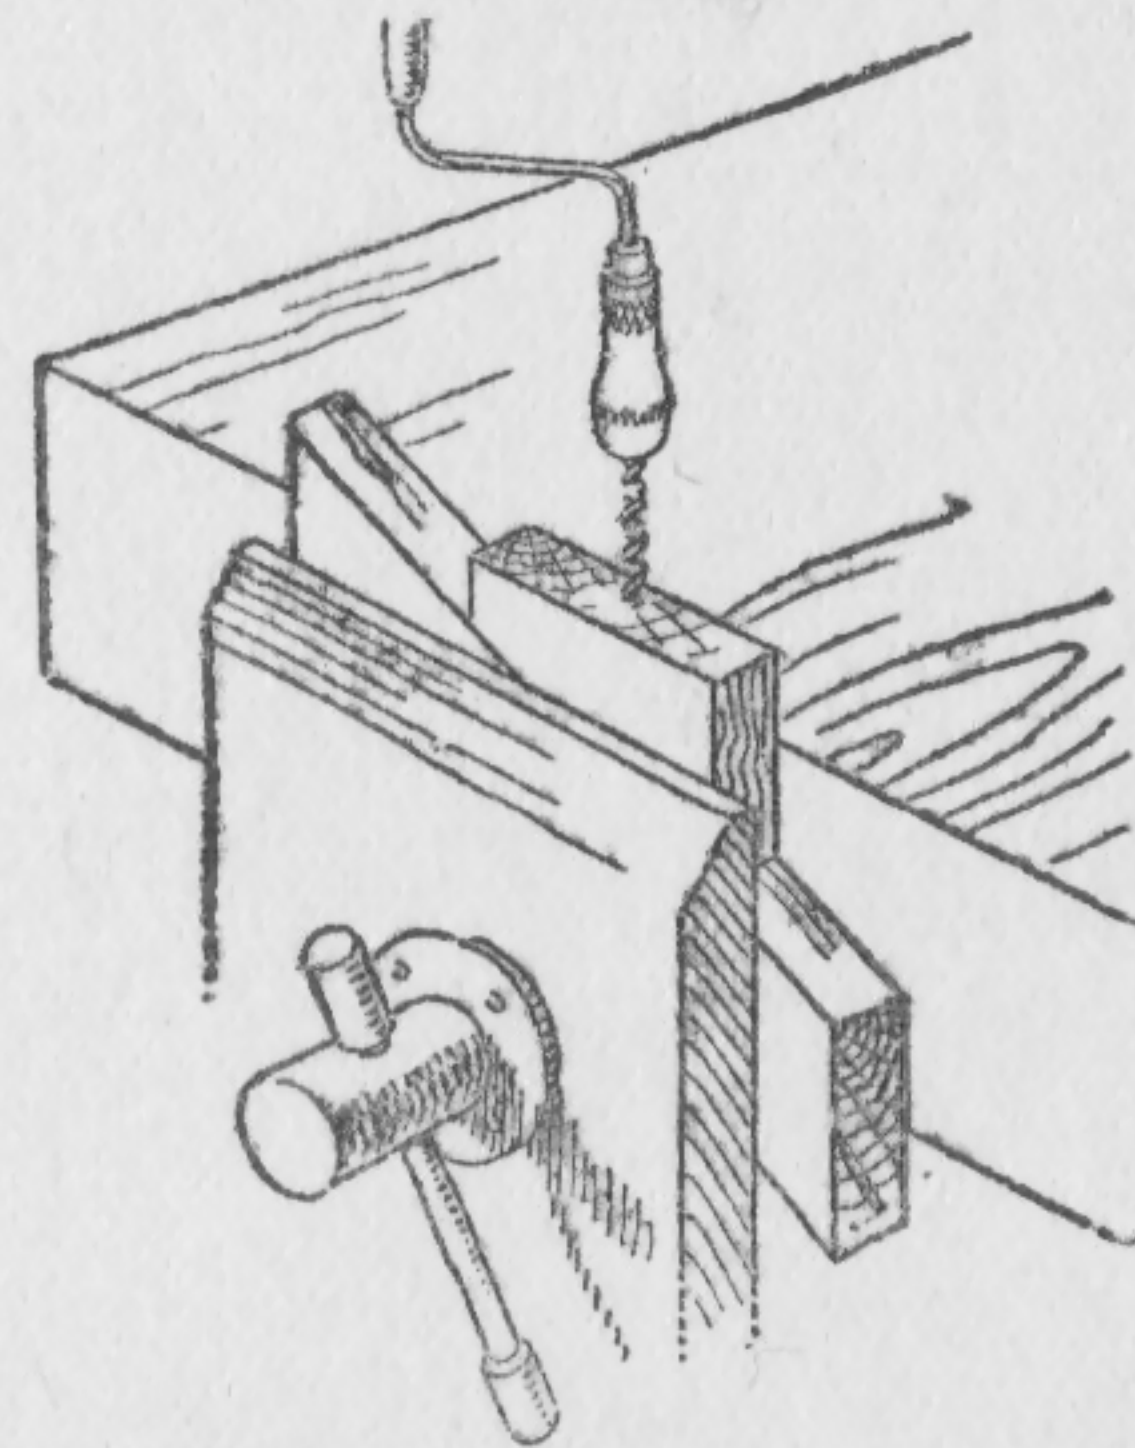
In much the manner of edgewise boring (Fig. 8), a hole may be bored at an angle. The guiding block should have its lower face cut at the desired angle and be clamped securely to the piece that is to be bored.
